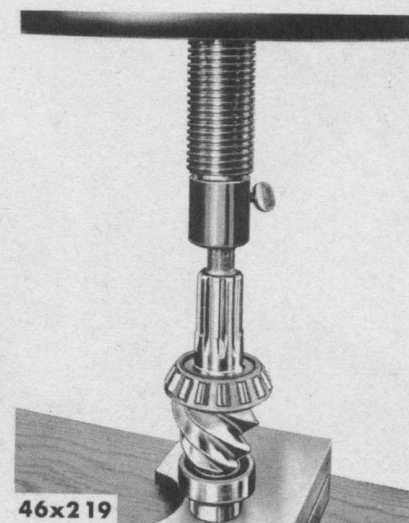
Installing Rear Pinion Bearing Pilot—Tool DD-950
